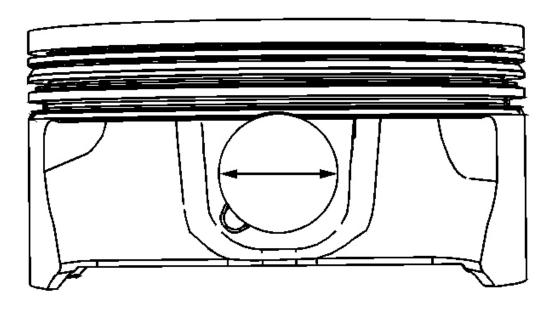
Piston Pin-To-Bore Clearance Courtesy of GENERAL MOTORS CORP.
